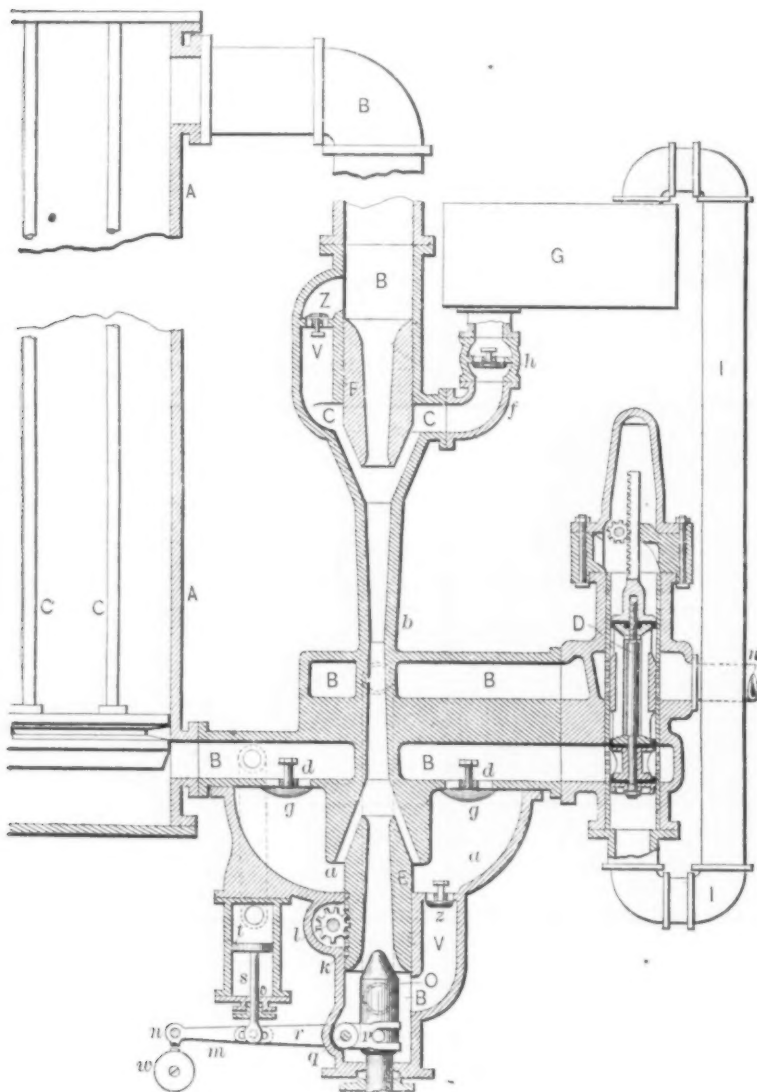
Sectional Elevation of Motor Cylinder, Valve and Circulating Pipe.
